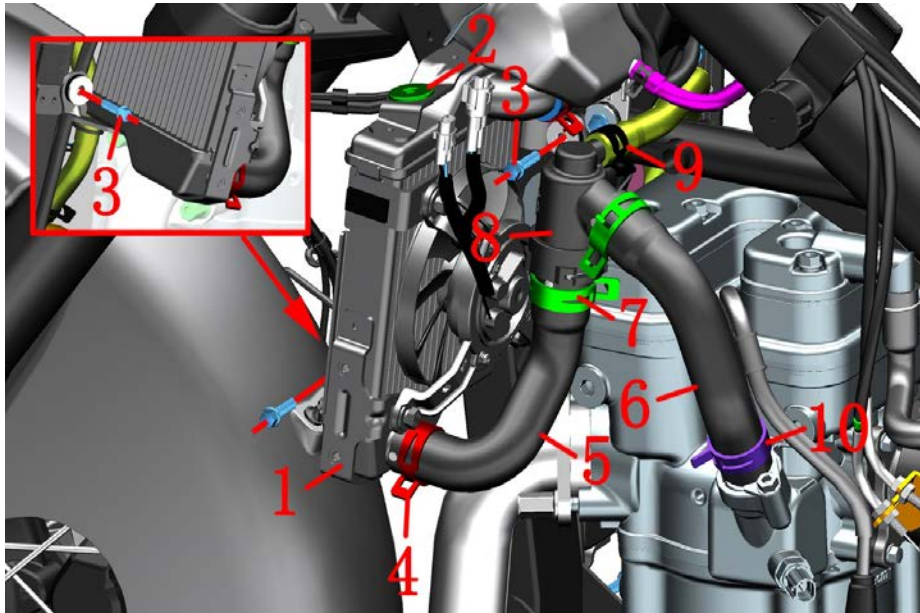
Cooling System Components			Radiator Assembly 3		CAUTION
